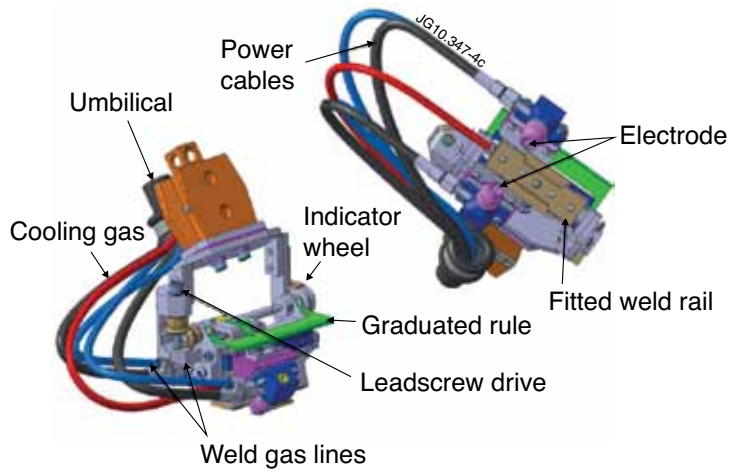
Pictorial views of the Remote Handling Welding Tool with a Weld Rail fitted ready for welding.
